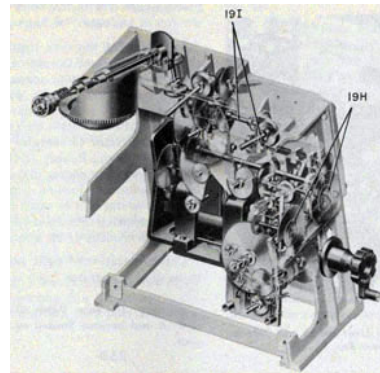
Installing Zero Reader Dials, Gearing, and Shafting.
